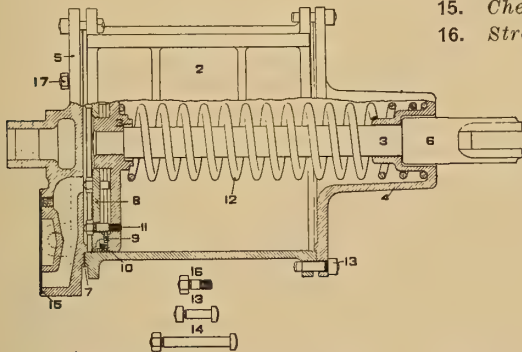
TWELVE INCH PASSENGER CAR BRAKE CYLINDER.
